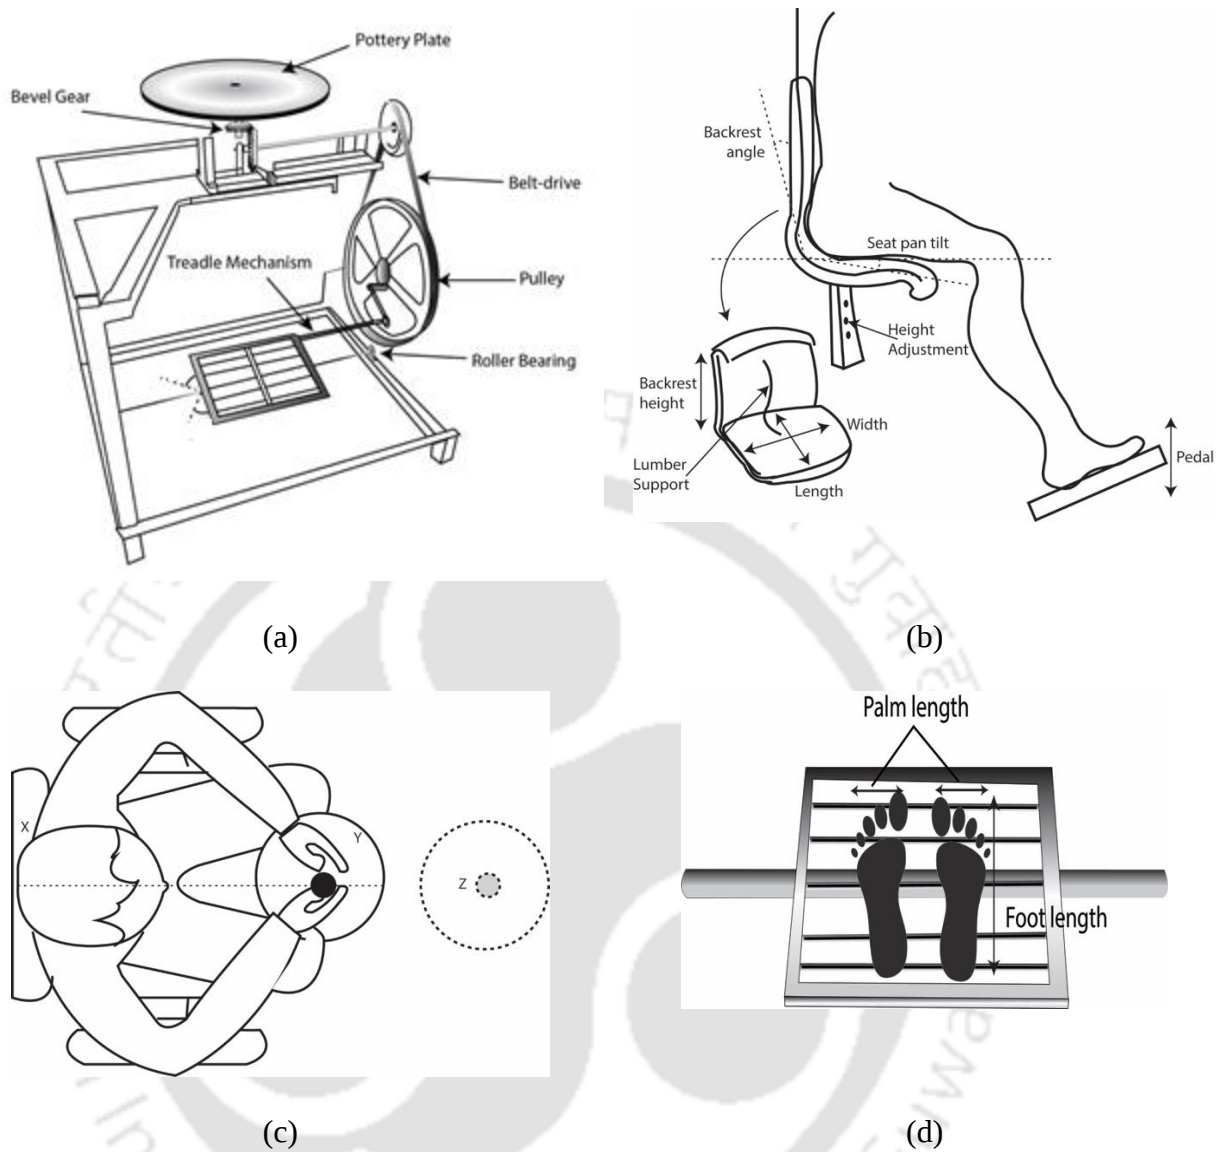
(a) Working mechanism of the IPC (b) Chair details of the IPC (c) Side view showing work surface reach; Y and Z represent work surface position for maximum and minimum distance, respectively (d) Showing the dimensions of the pedal
